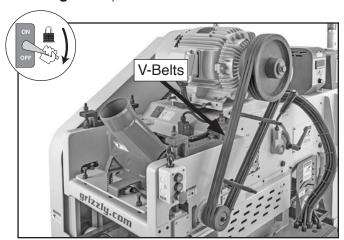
Upper cutterhead belt cover removed and V-belts exposed.
